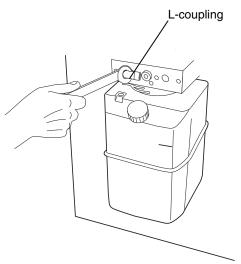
Mounting the L-coupling to the hydraulic pump
